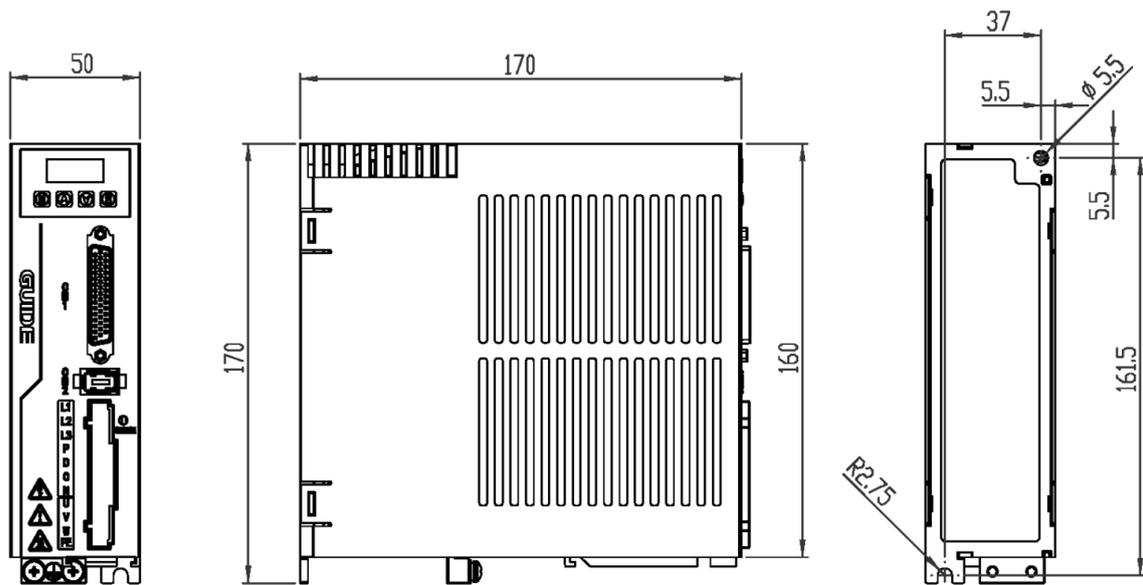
750W~1000W Servo Drive (S2 model) External Dimension Drawing
